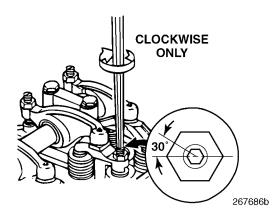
Turning Adjusting Screw an Additional 30 Degrees (1/2 Flat)
